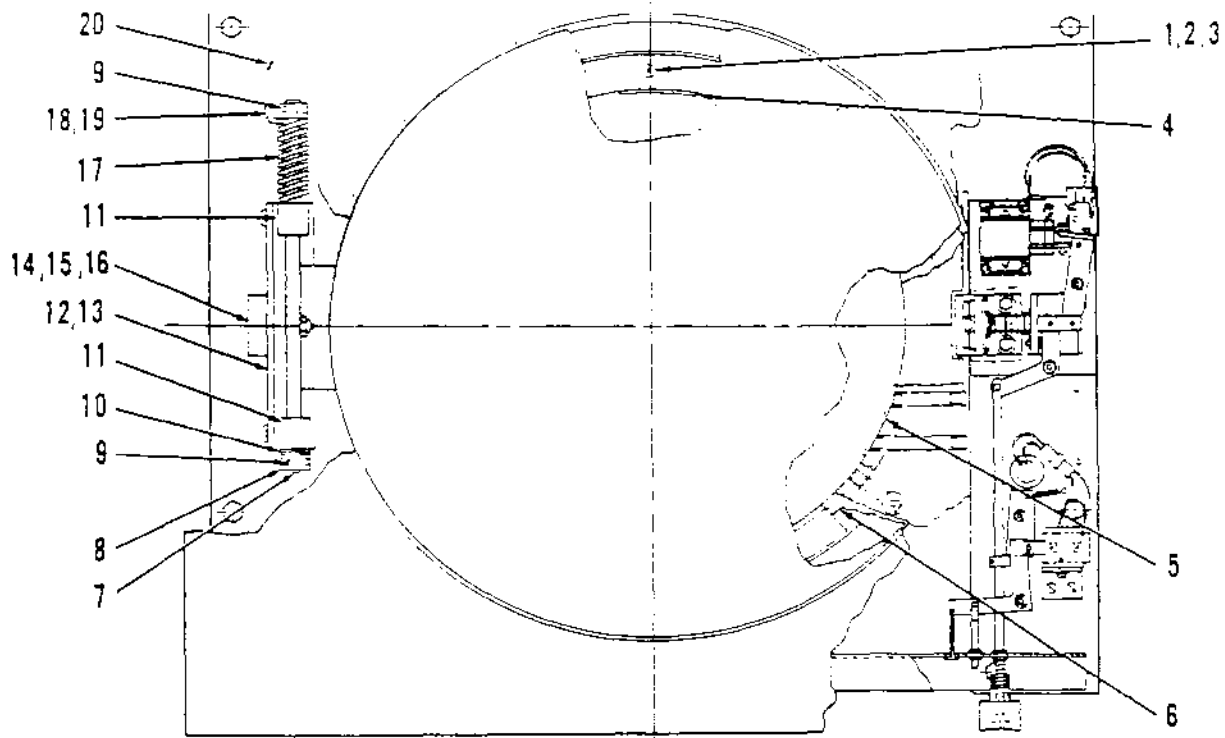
RC-5B PLUS Door Interlock Assembly (Part B)
